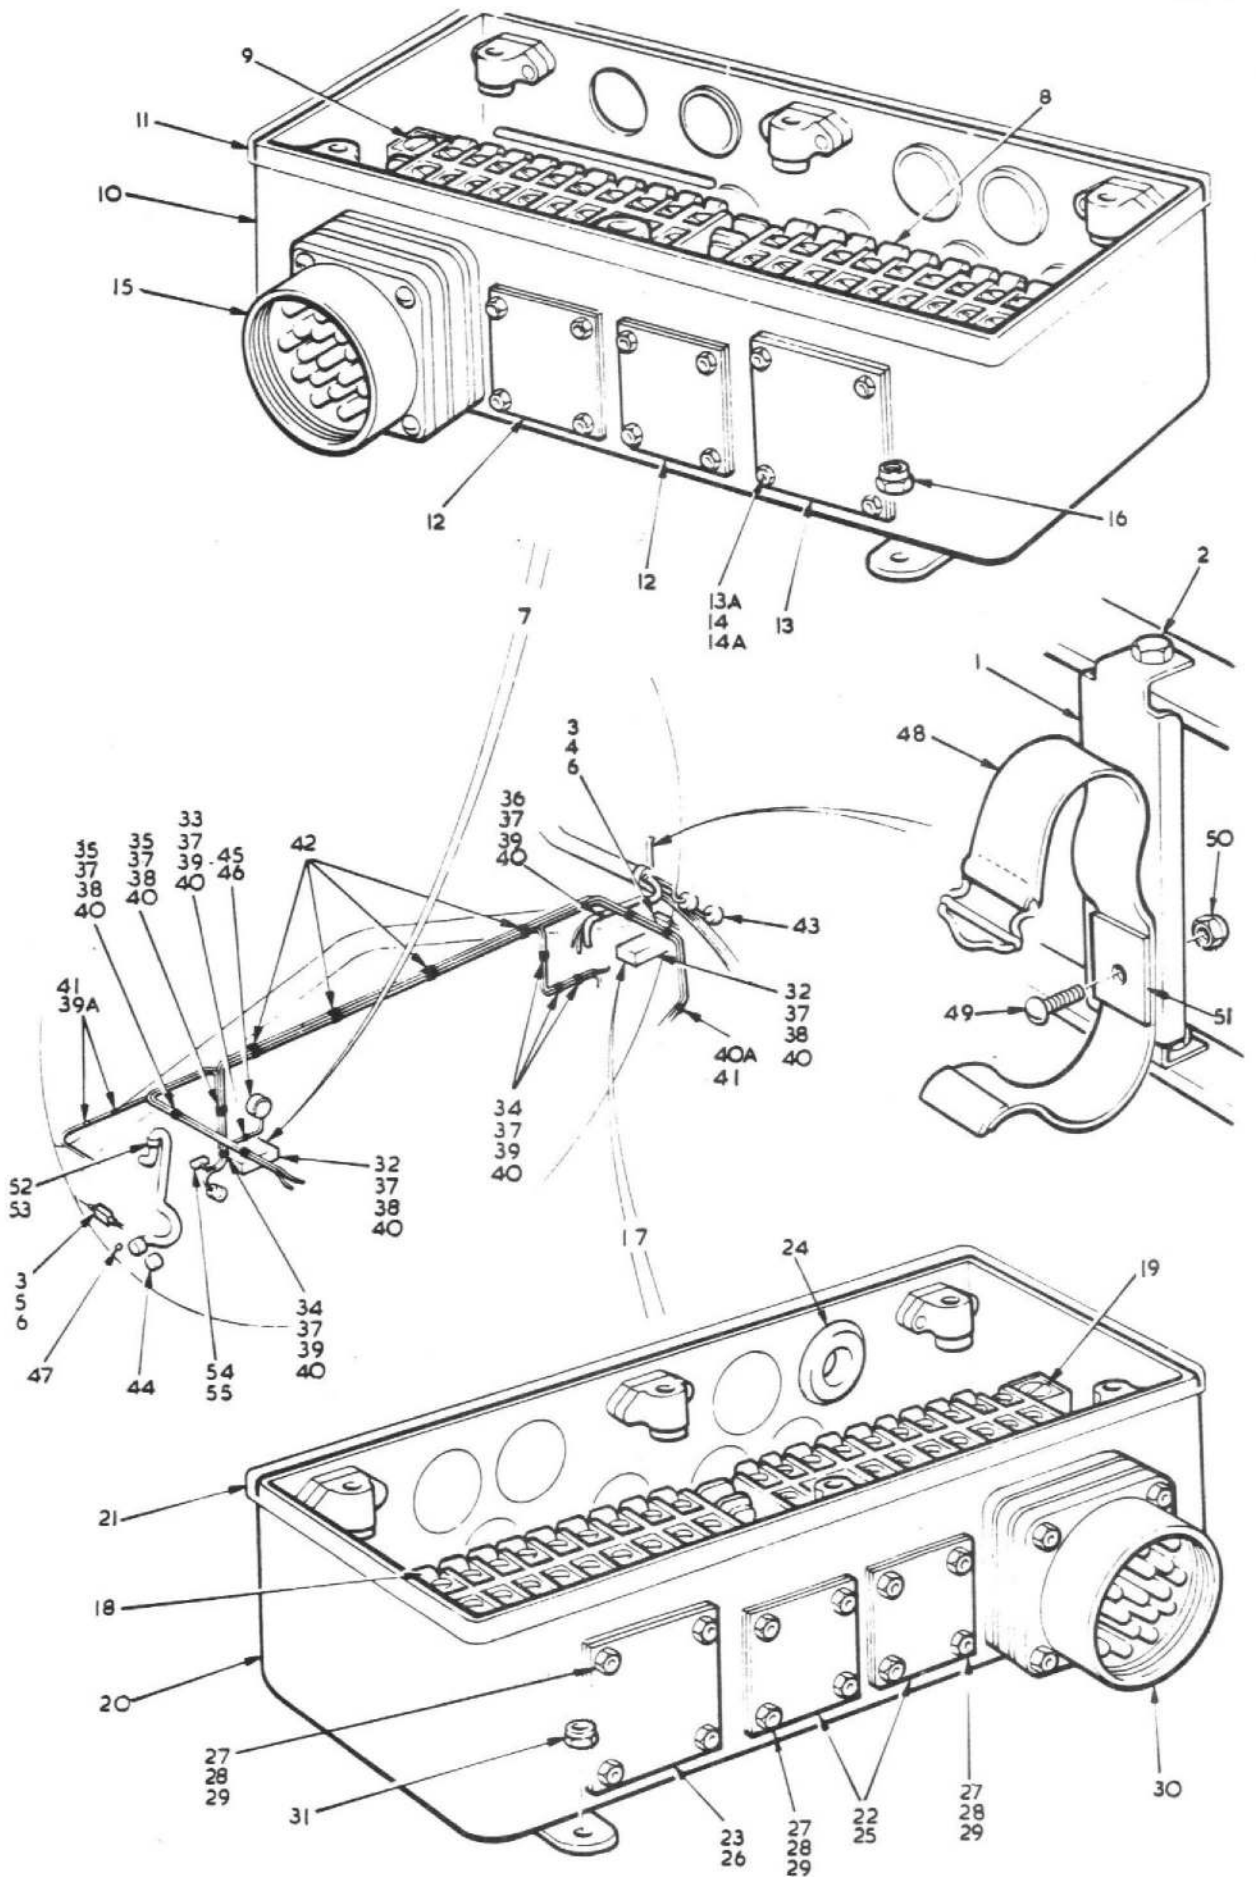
ELECTRICAL EQUIPMENT IN CENTRE FUSELAGE
